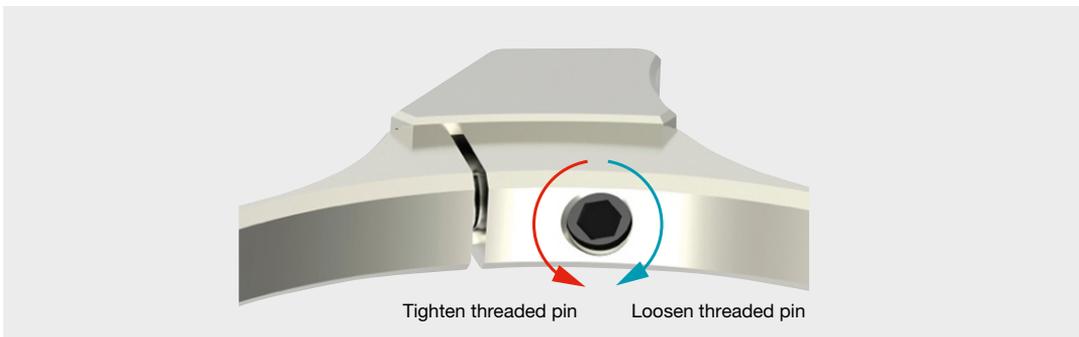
Direction of rotation for tightening and loosening of the threaded pin
